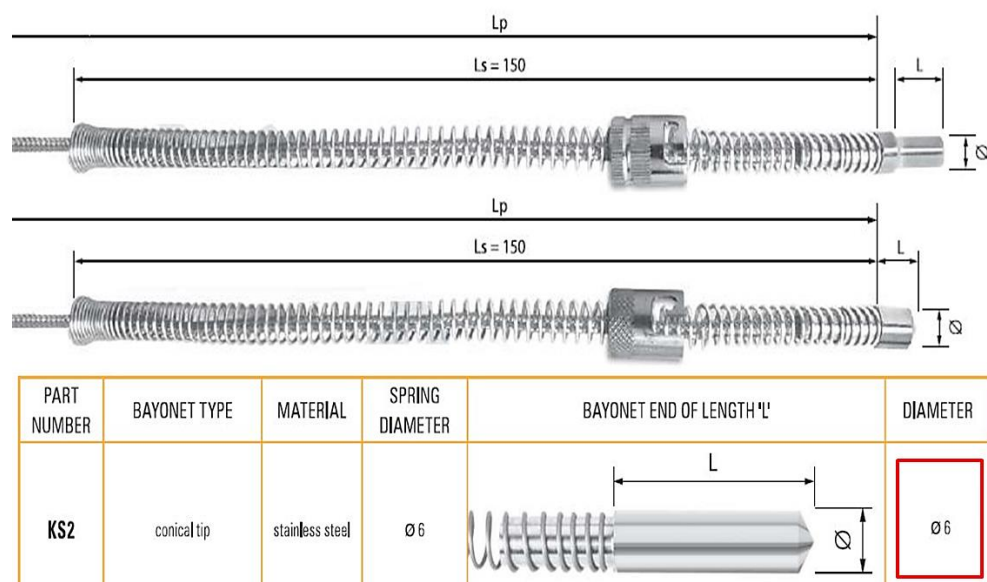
Czah-pomiar Sp. z o.o temperature sensors - Dimensions
